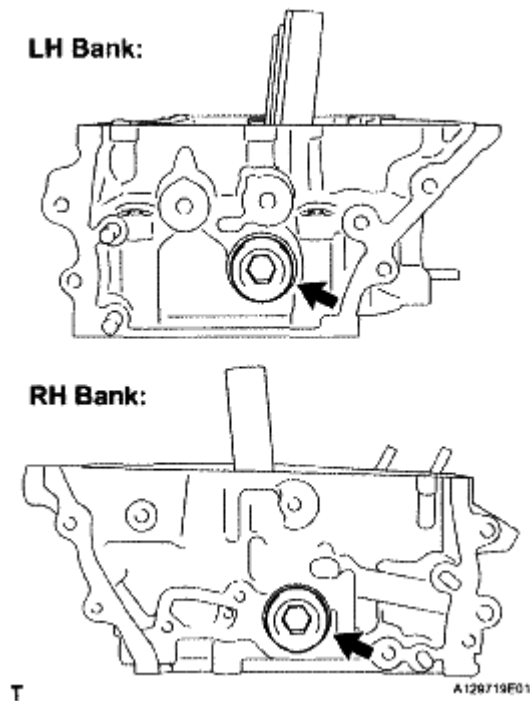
Using Hexagon Wrench To Remove No. 2 Straight Screw Plugs & Gaskets
